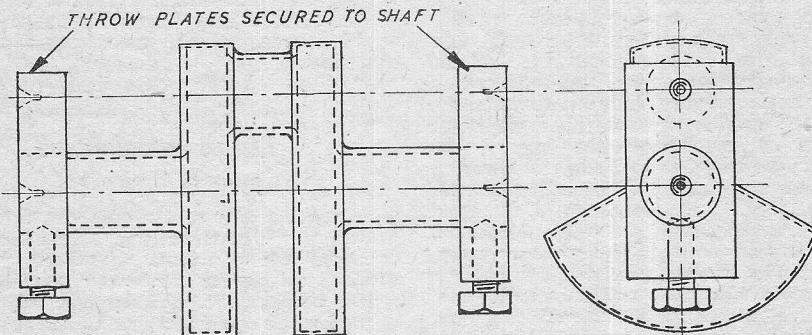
A crankshaft fitted with throw plates to take crankpin turning centres
